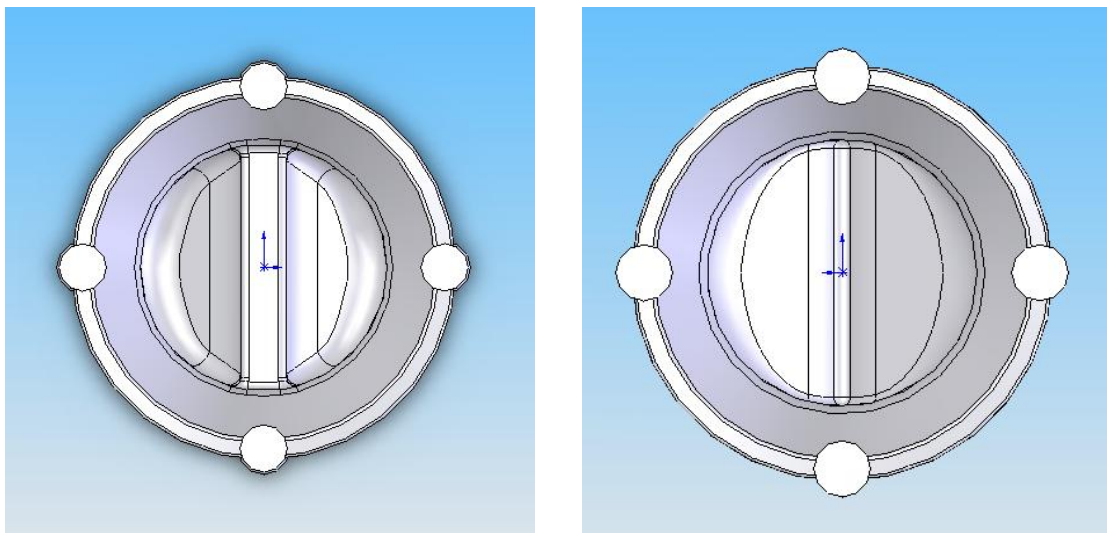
Proximal outlet view of valve die with gates (left) and distal inlet view of valve die with gates (right).
